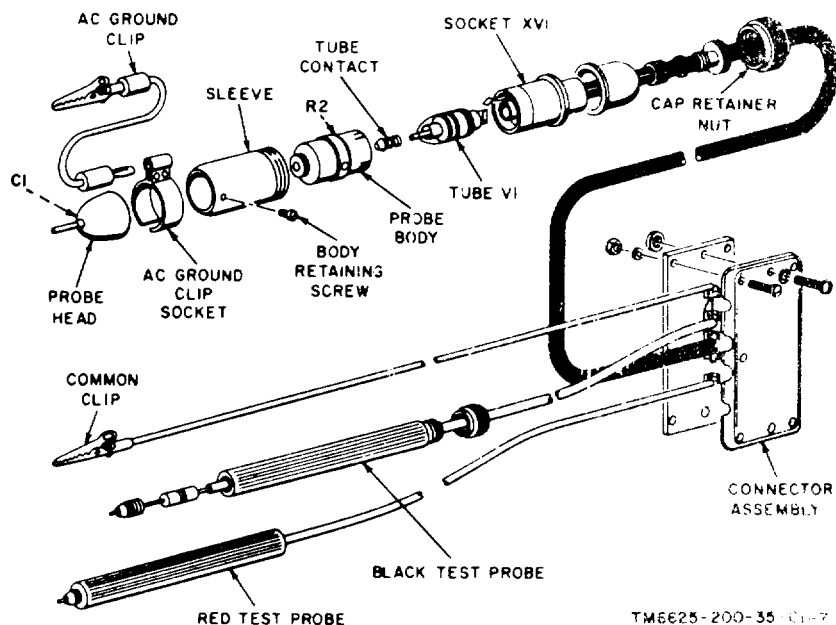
Multimeter ME-26A/U AC probe disassembled.
